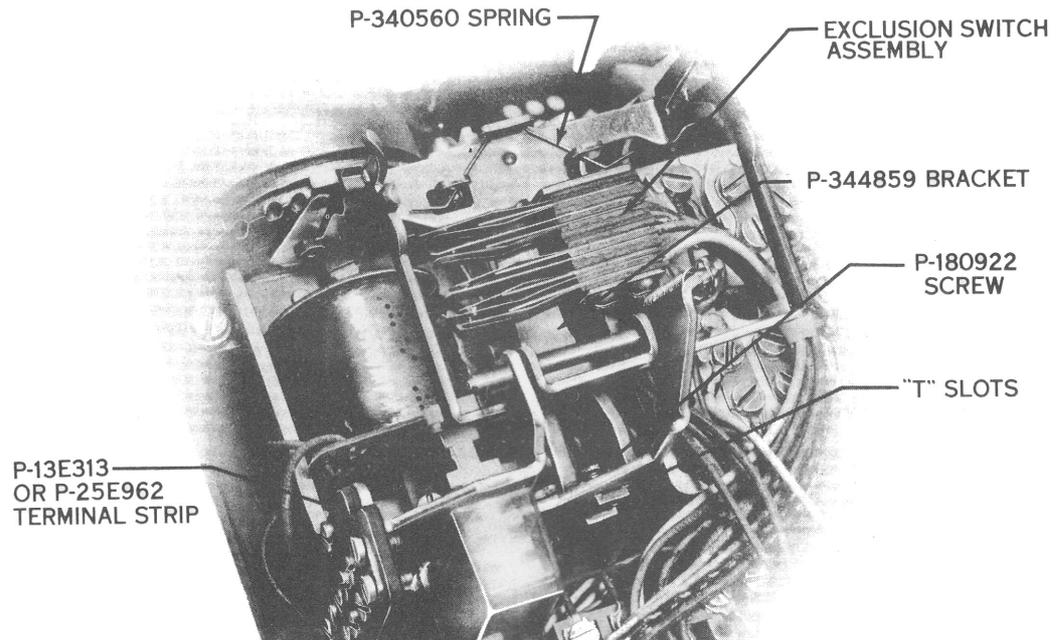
P-25E118 Exclusion Switch Assembly, Installed
